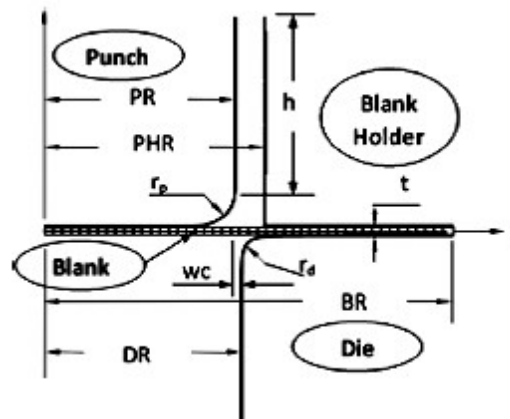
Geometry of drawing die assembly with circular blank [1]
